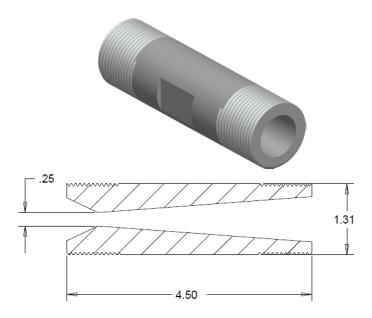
The Sonic Nozzle With Cutaway View, Showing Converging and Diverging Interior Sections
